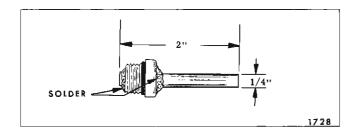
Reservoir Filler Plug Adapter
